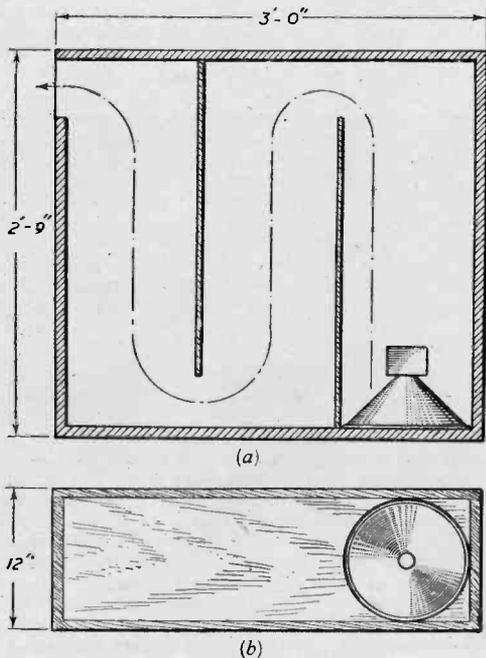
Another form of “labyrinth” seen in plan and elevation.
